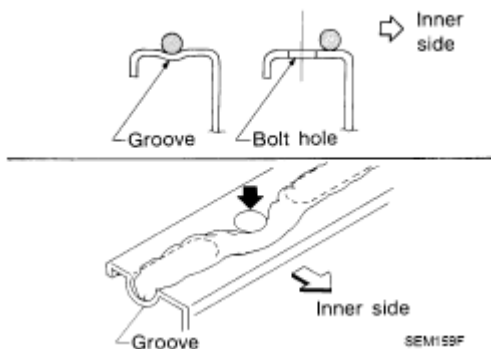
Applying Bead Of Sealant To Bolt Holes
